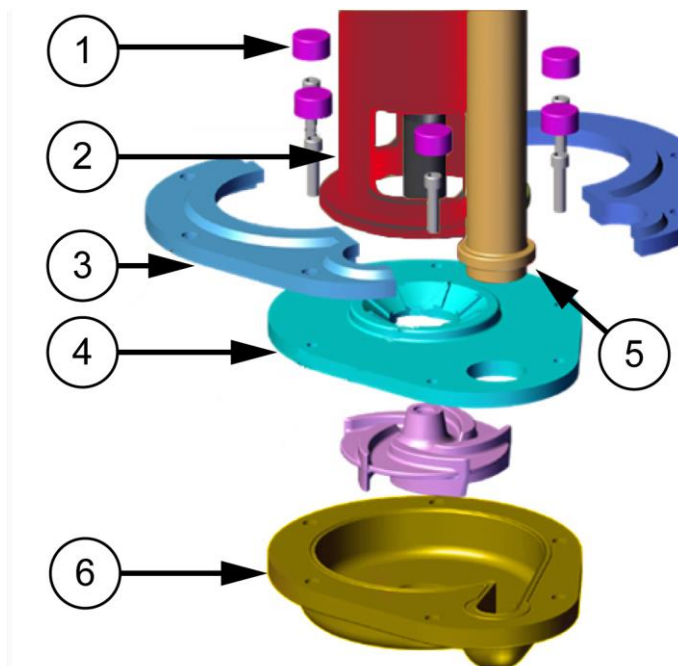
1.5V1.5VPE and 2.5V2.5VQE, Fitting Back Liner, Impeller, Casing, Discharge Pipe, and Column Clamp.
